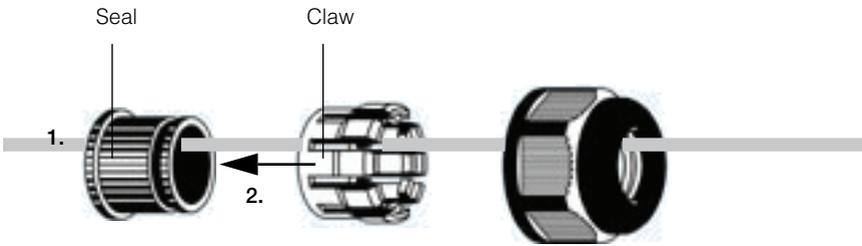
Inserting the cables into the seal and assembling the claw and seal
